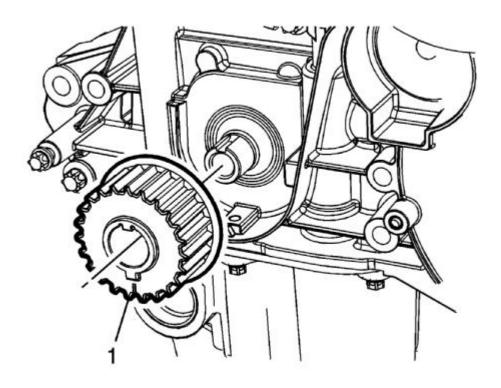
Crankshaft Sprocket Courtesy of GENERAL MOTORS COMPANY
